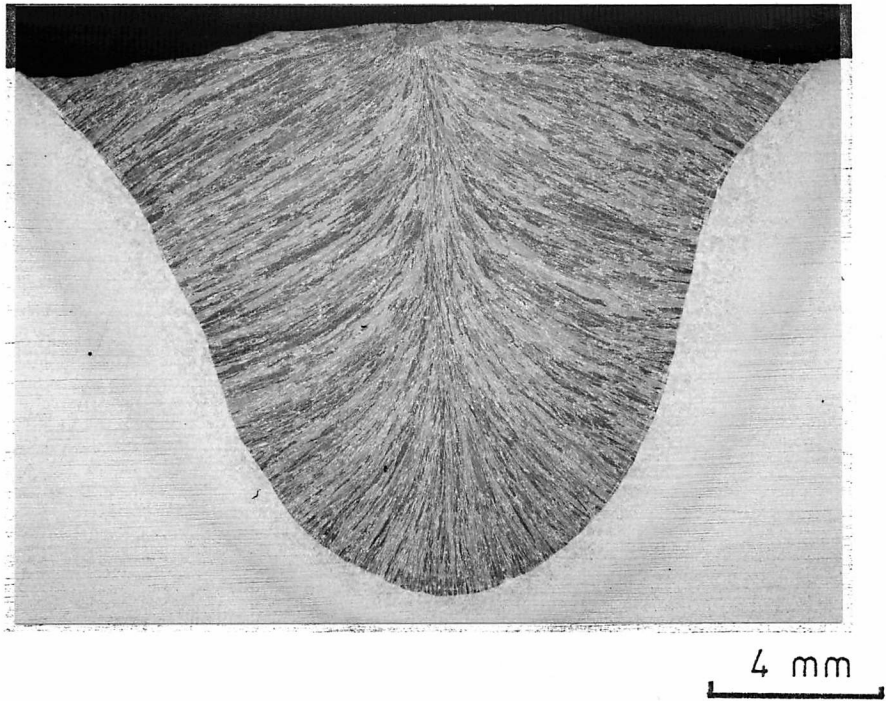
Macrostructure of one pass submerged arc weld deposits.
